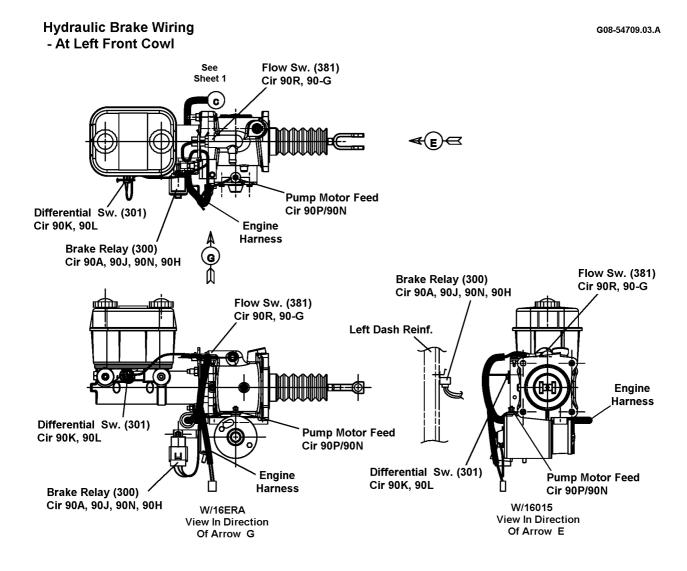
Hydraulic Brake Wiring — At Left Front Cowl
